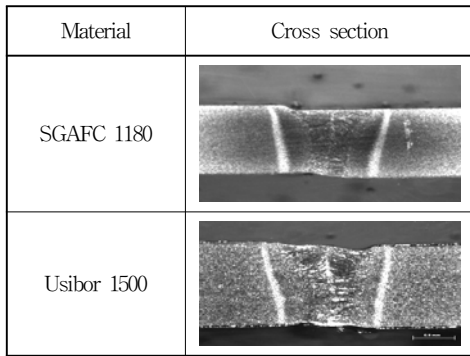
Cross section of butt welds of SGAFc 1180 and Usibor 1500
